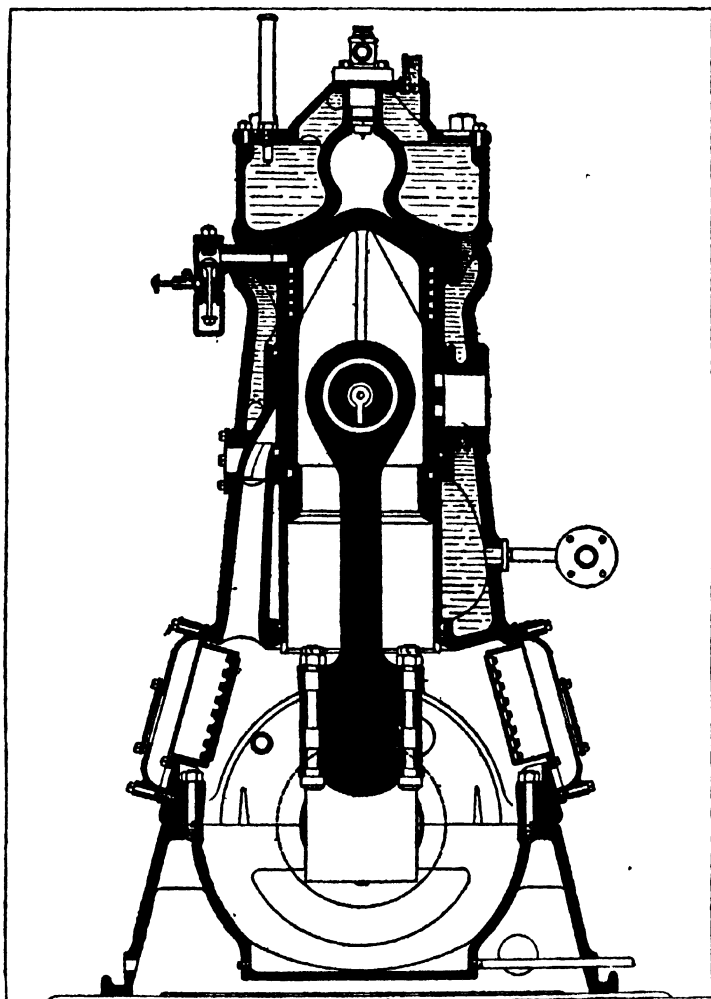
PETTER "C" TYPE HEAVY OIL ENGINE
